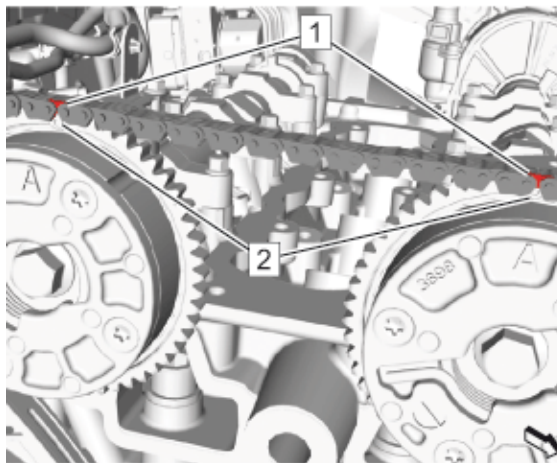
Camshaft Position Actuator Marks And Timing Chain Marks
